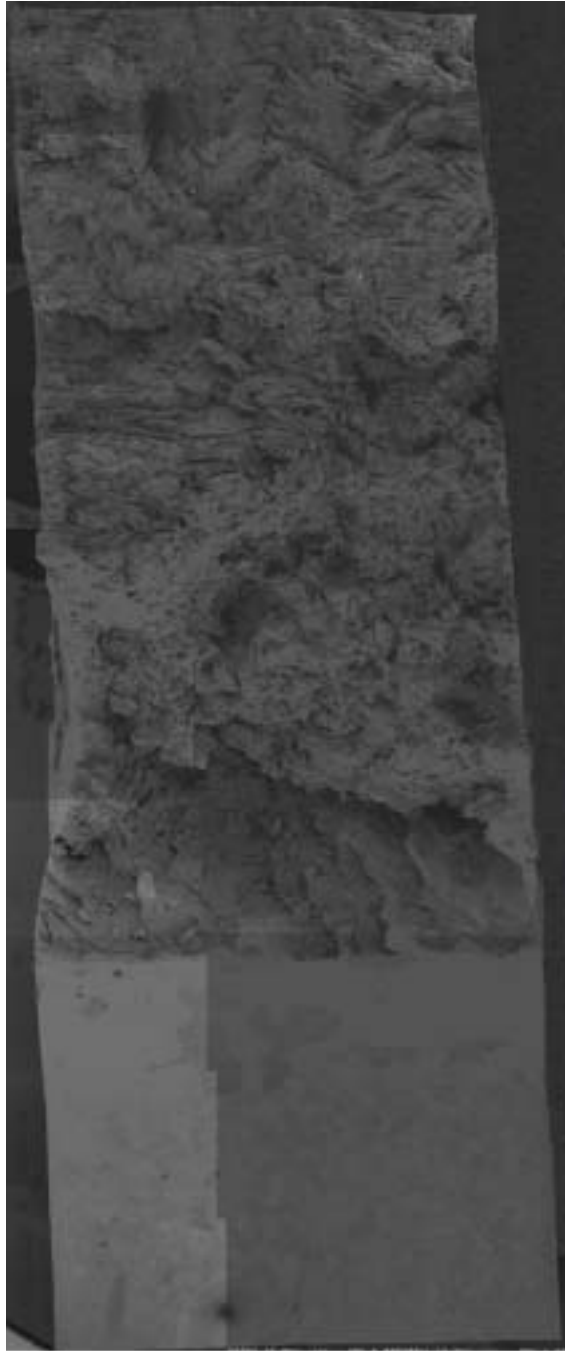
Creep fracture surface of test piece of CT (800°C)
